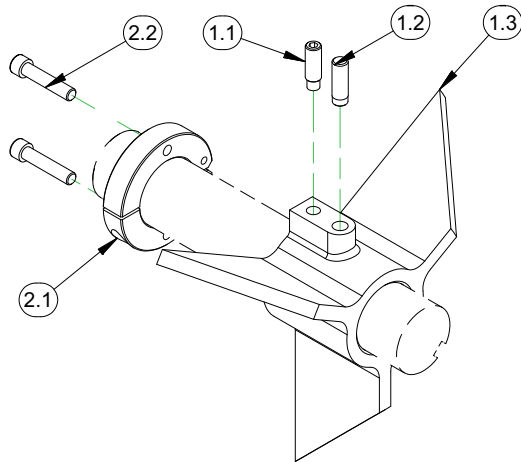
AIR MOTOR CE ASSEMBLY (P/N 36959)
